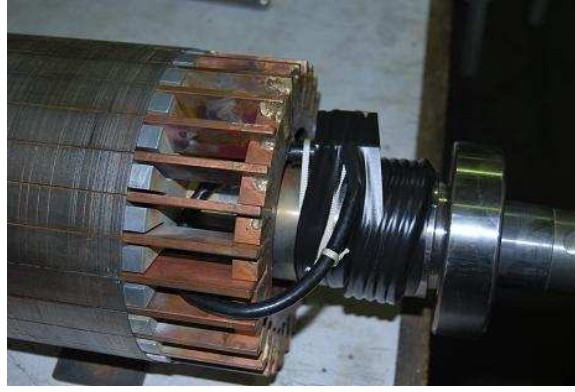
Rotor with Rogowski coil fitted on the end ring.
